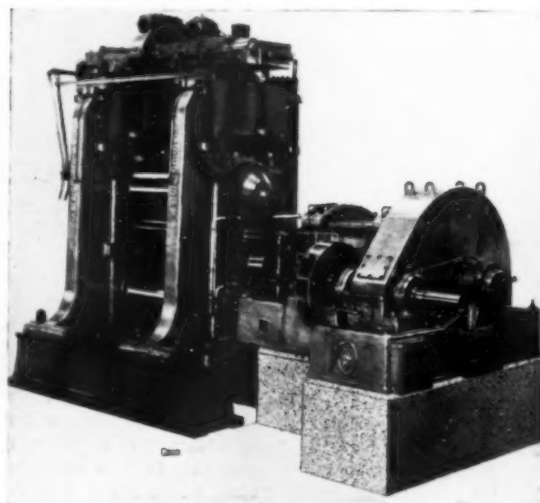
A large four-high sheet mill for sheet up to 4 ft. wide.
